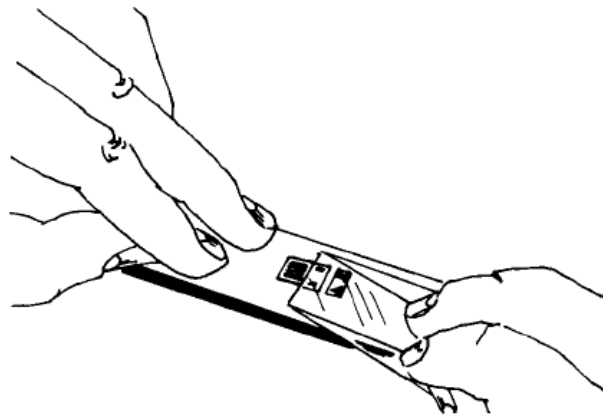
Tape is removed with strain gauge successfully bonded to the surface of the open die forged plate²⁰.
